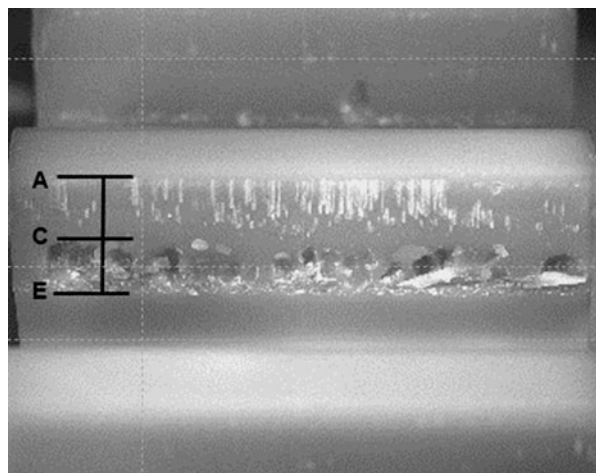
Exemplary pitting damages including positions A, C, and E at gear flank [16]
